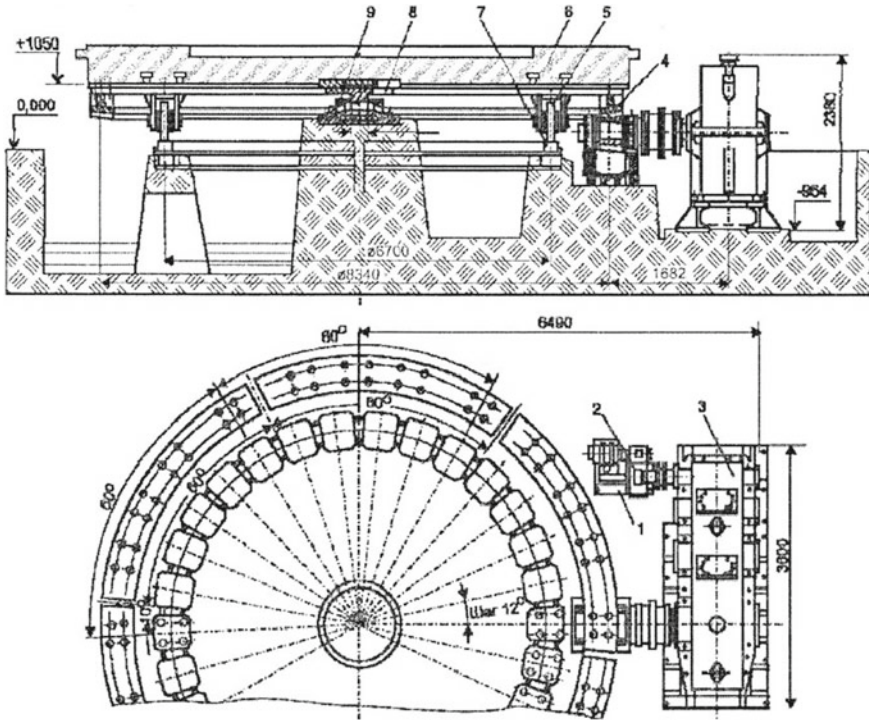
Device for rotating the bathtub of the furnace, 1, 3—gear; 2—electric motor; 4—a gear wheel; 5—track roller; 6—concrete slab; 7—circular rail; 8—supporting pin; 9—nozzle
